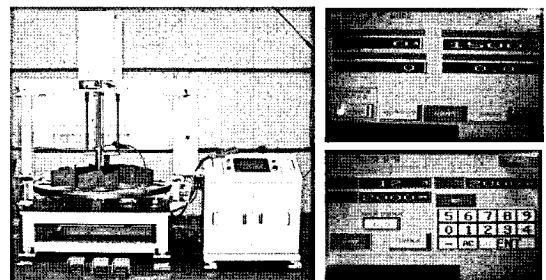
Developed welding index table for only fan impeller and touch screen
